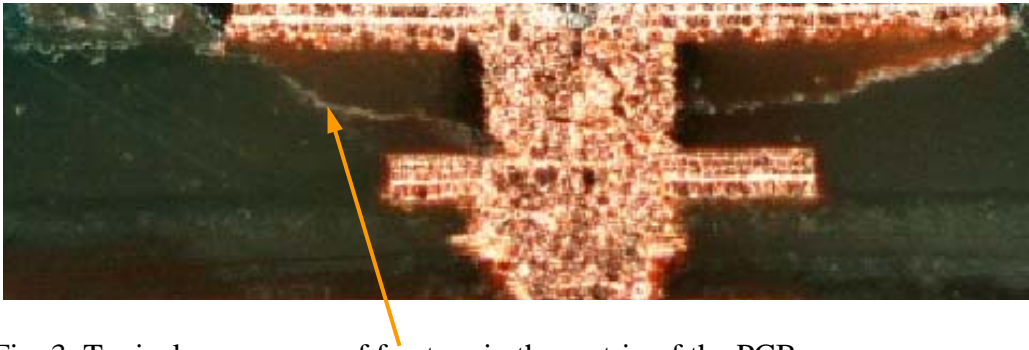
Typical appearance of fracture in the matrix of the PCB.
